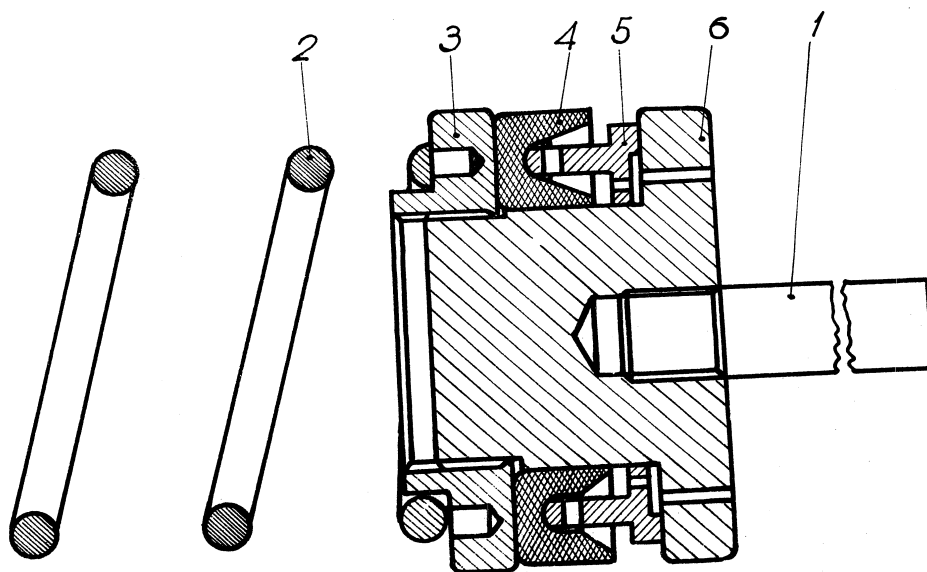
COMPENSATOR PISTON — ASSEMBLY
